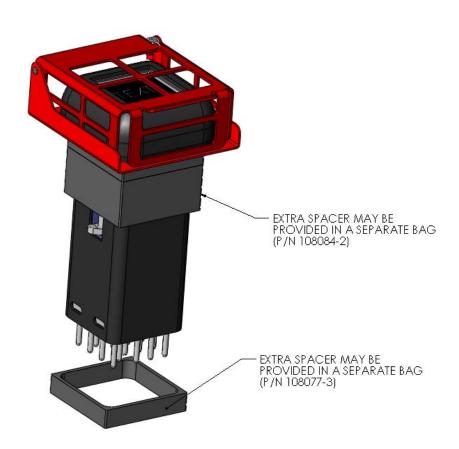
EXAMPLE OF AS SHIPPED ASSEMBLY
